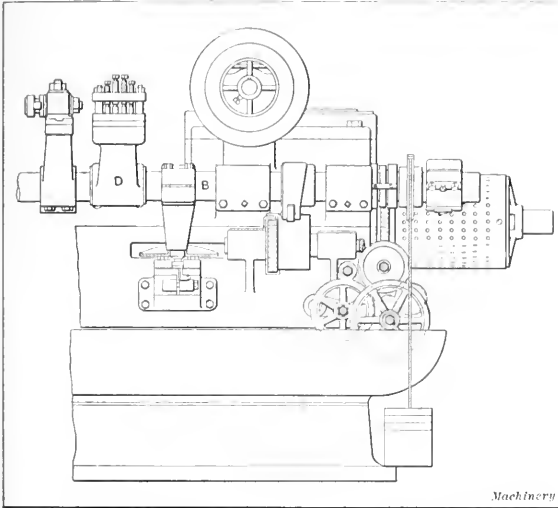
Rear View of Head End of Fay Automatic Lathe
